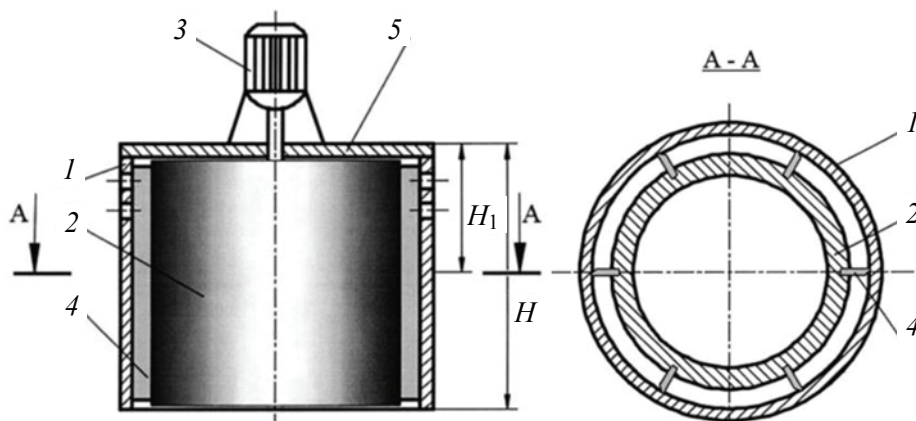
Scheme of a rotary apparatus with movable blades: 1 – stator; 2 – rotor; 3 – rotation drive; 4 – blade; 5 – cover [55, © Al-Shiblawi]
